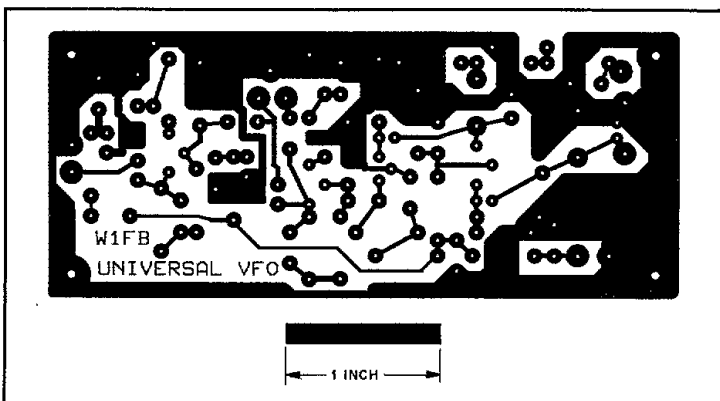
Circuit-board etching pattern for the VFO PC board. The pattern is shown full-size from the foil side of the board. Black areas represent unetched copper.
